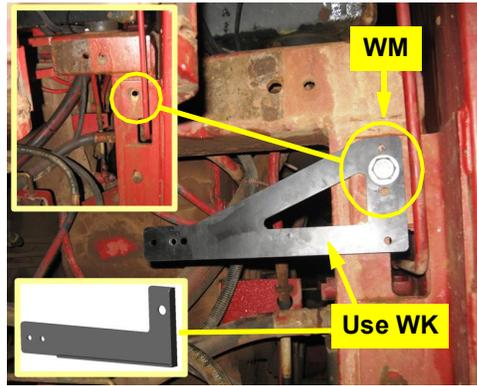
with insets: Installed WAS mounting bracket (prototype bracket shown installed)
